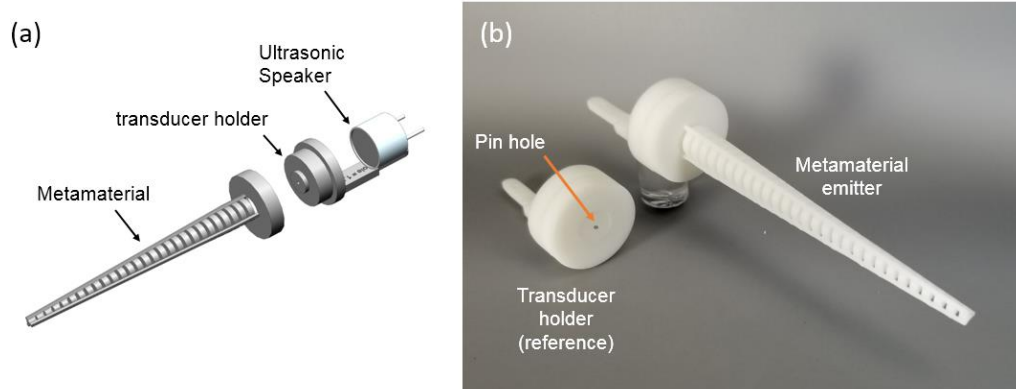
20 (a) Exploded CAD model of metamaterial emitter assembly. The ultrasonic speaker is a commercially available unit with a center frequency of 25 kHz. (b) Photograph of metamaterial emitter realized studied in this work. The Transducer holder features a pinhole 1.2 mm in diameter to serve as a point source.
